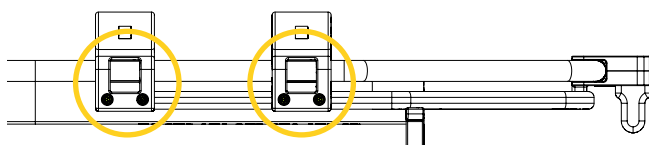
Tightening the cot support structure (4 of 8 screws illustrated)
